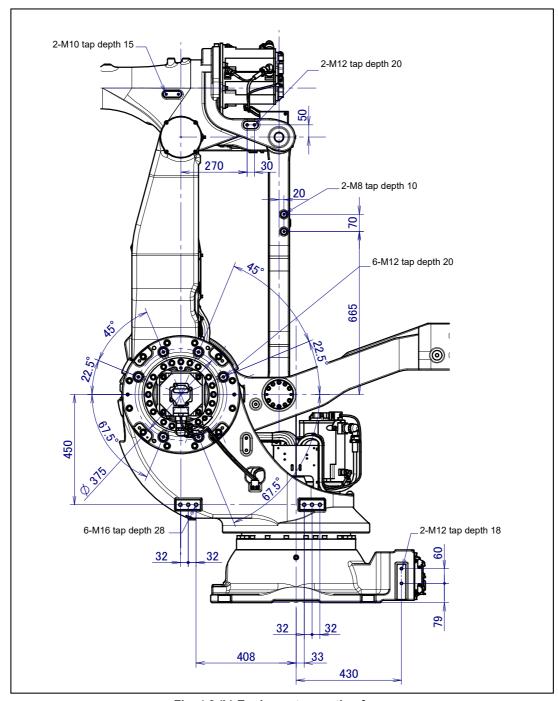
(h) Equipment mounting faces (M-900*i*B/330L (2/2))
